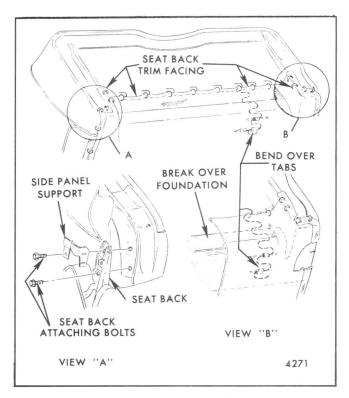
Front Seat Back Attachment - Typical Four Door Attachment - Styles with Full Width Conventional Seat
